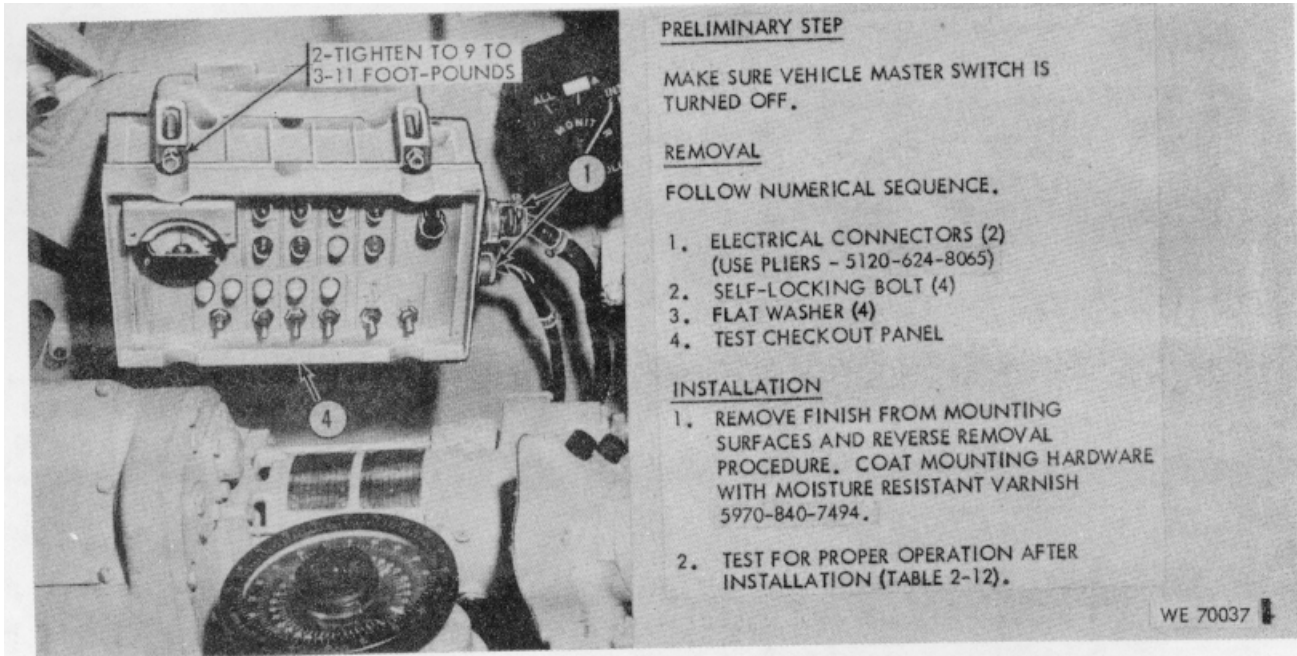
Removal/installation - missile subsystem test checkout panel
